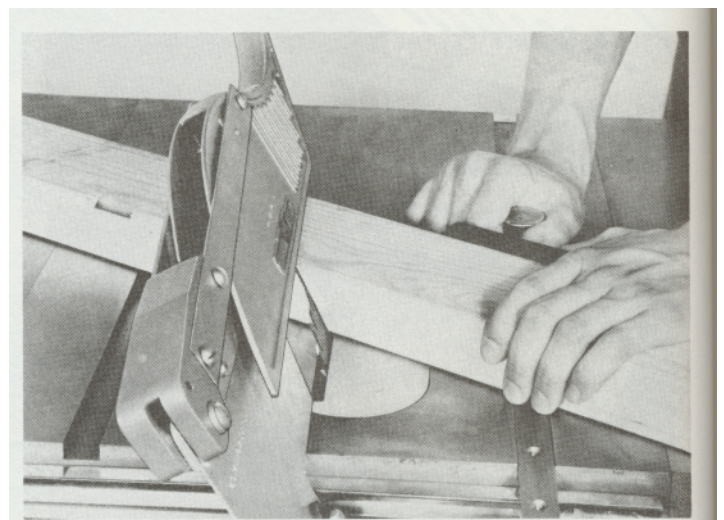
Cutting a compound angle on 2 x 4 stock. To make these cuts, both blade and miter gage are set at an angle.
